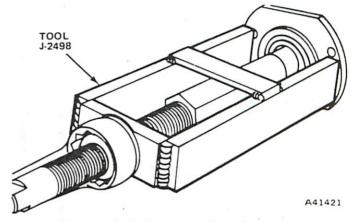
F-20 Axle Shaft Removal—CJ and Scrambler Models
